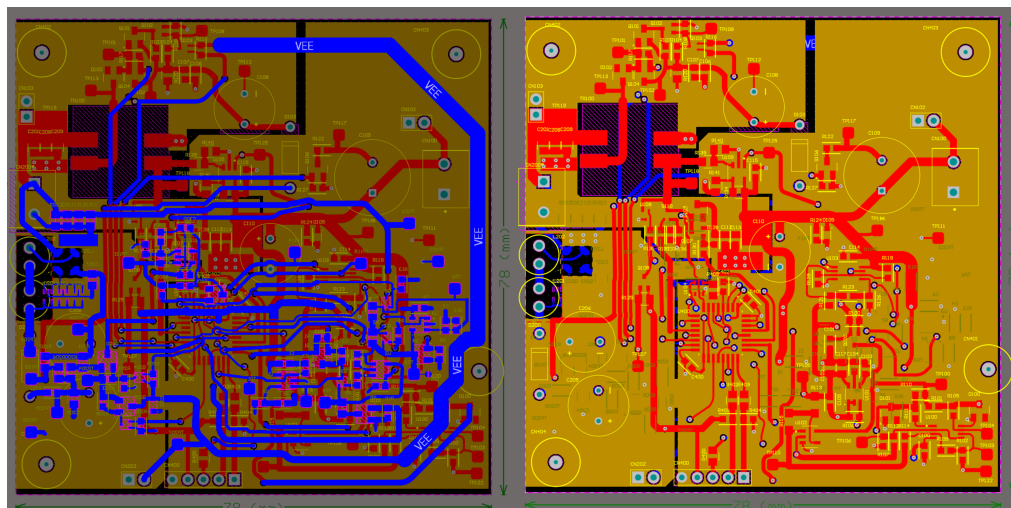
PCB Layout. Left: Bottom layer, Right: Top layer.
